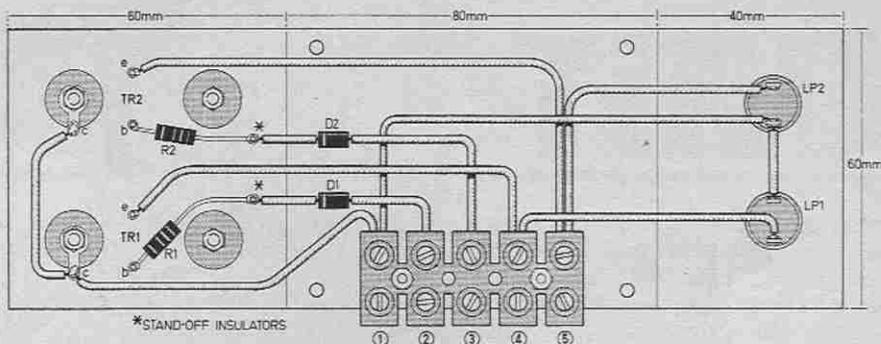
The complete Flasher Unit shown "opened up" for clarity. The chassis is made from a single piece of 18 or 20 s.w.g. aluminium, with two bends as indicated. All drilling should be carried out before bending. See text for further details.
